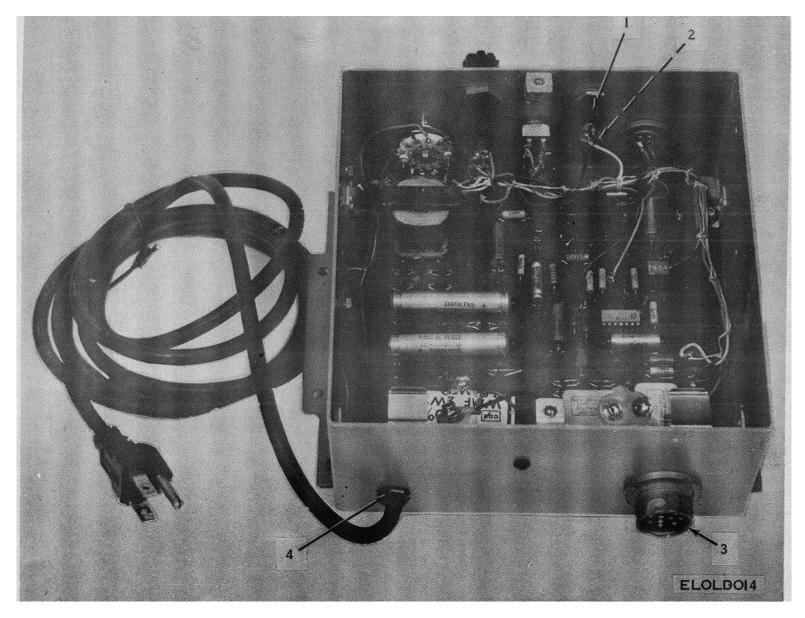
Main Housing Assy., Rear View-Without Shield.
